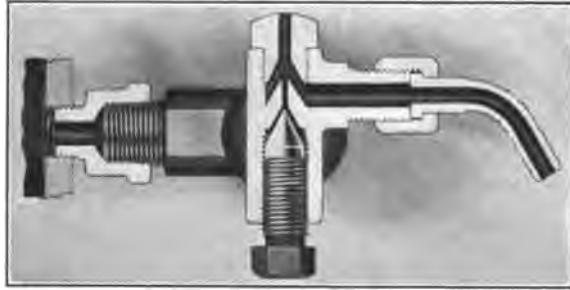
Dust allayer of the Chicago Pneumatic Tool Co.
